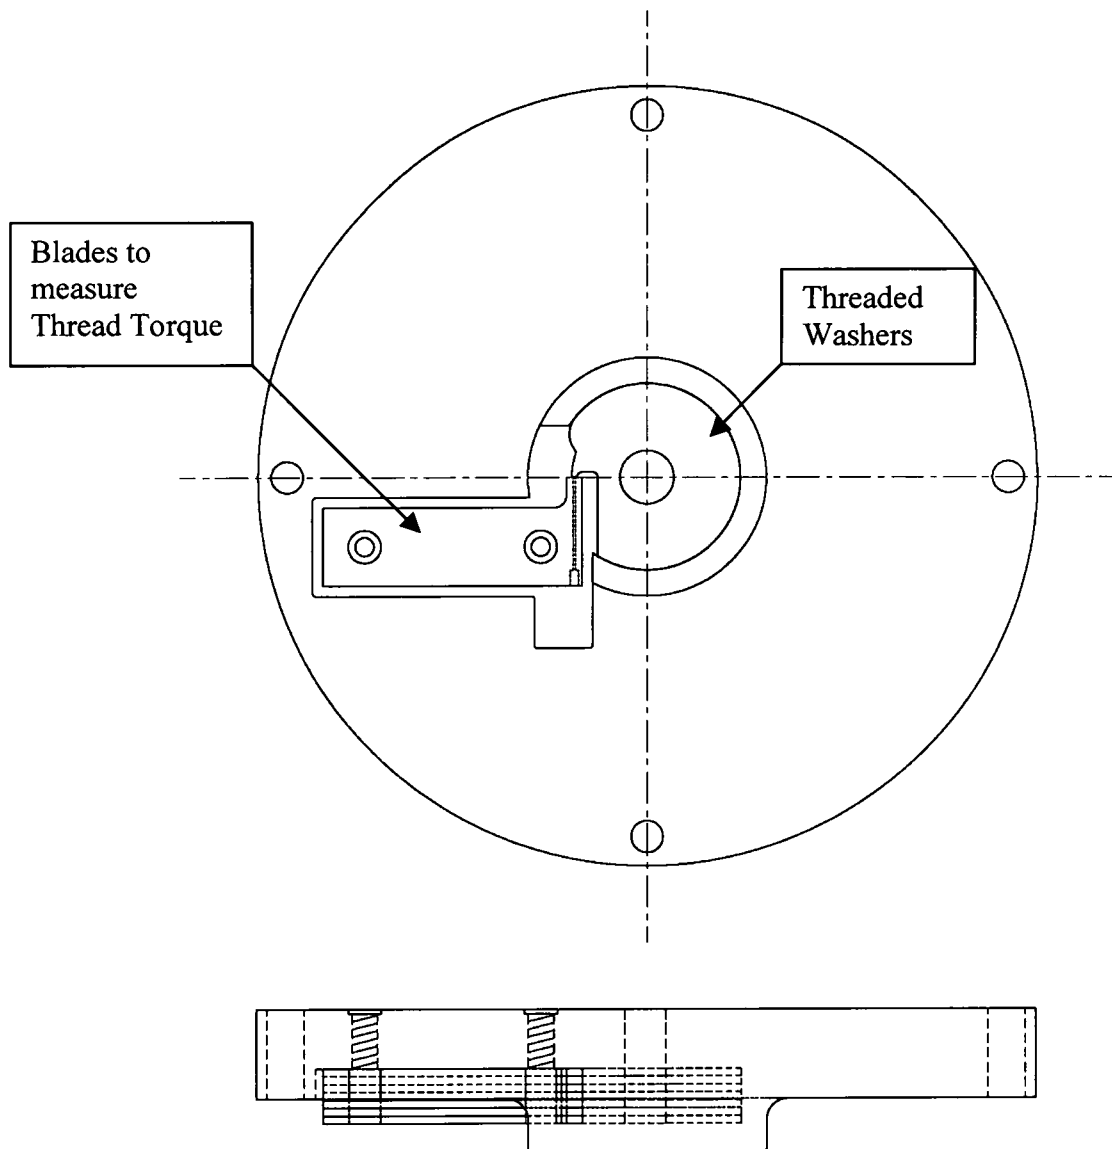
Schematic of the fixture holding the blades and threaded washers.
